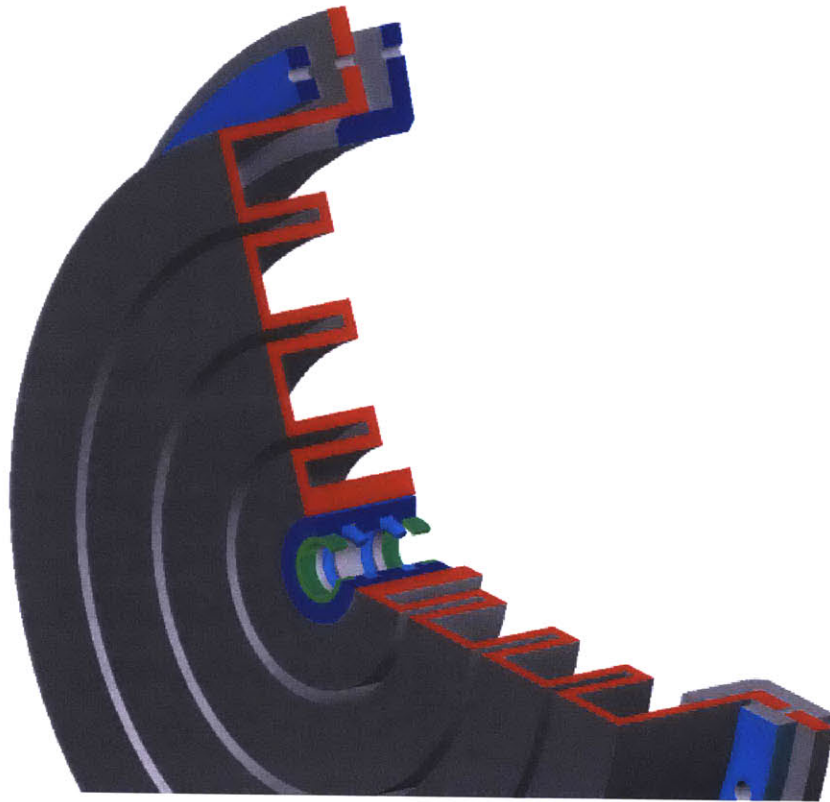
Drawings of the bellows assembly with shaft seal and retaining rings. The shaft seal has two buna-n o-rings and two teflon bushings. The larger inner retaining ring bolted to the side of the Lexan housing, and mated with an o-ring on the inner radial face. The smaller outer retaining ring compressed the bellows on the outermost planar surface to form a gasket seal.
